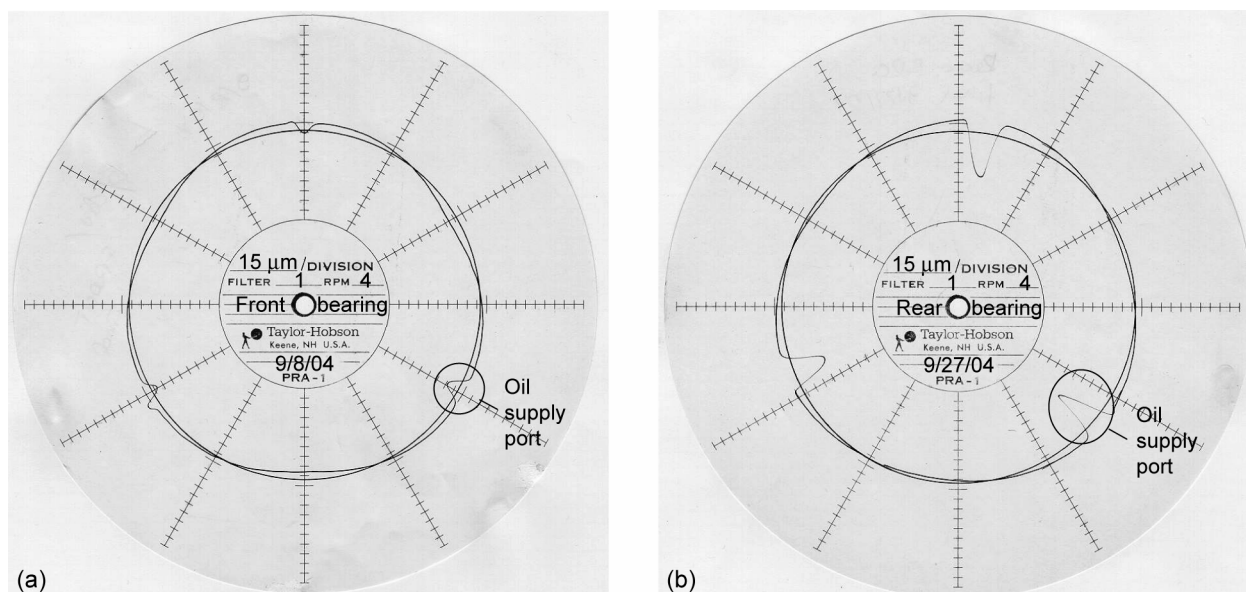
Front and rear wave bearing profiles. (a) Front bearing. (b) Rear bearing.
